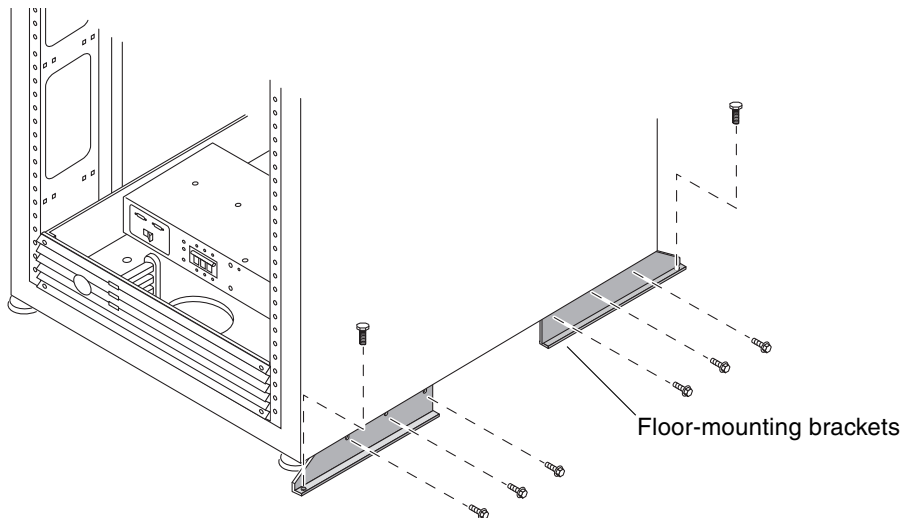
Attaching the Floor-Mounting Brackets
